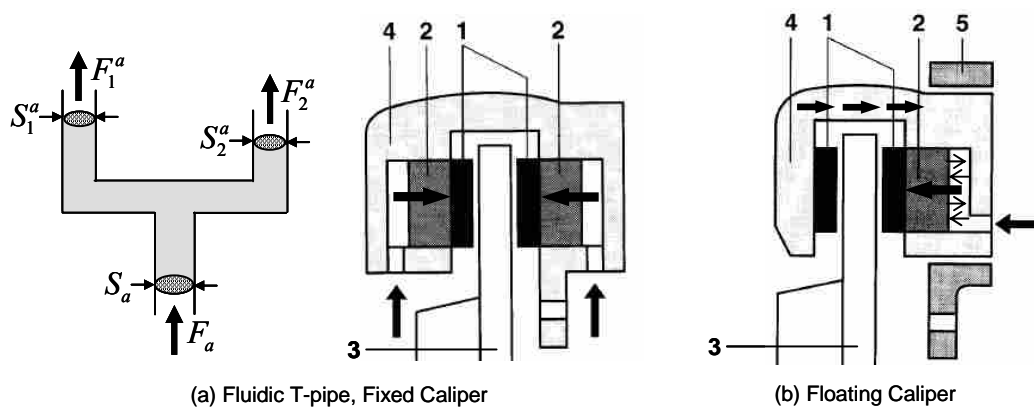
Fixed and floating hydraulic disc brakes, with the following components shown: (1) brake pads, (2) pistons, (3) rotor, (4) caliper, and (5) support for floating caliper ([11], arrows added). Fluidic T-pipe reproduced from [9].
